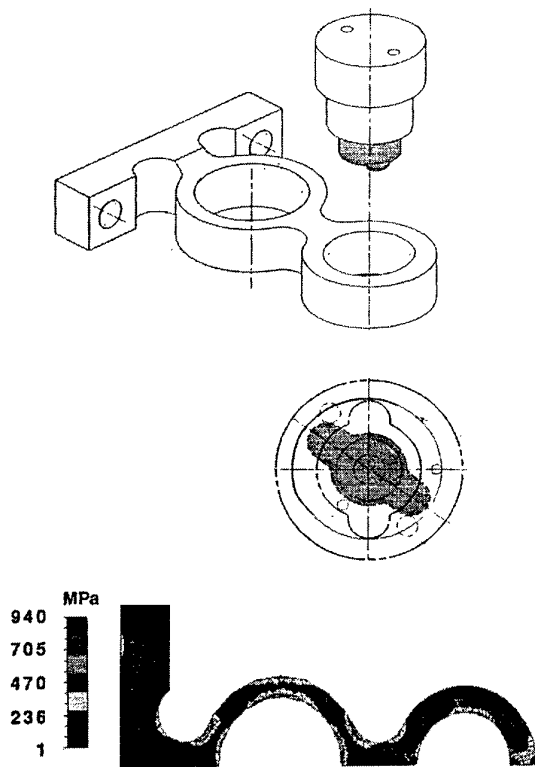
Cocking cam assembly device for the rear part of the fuselage.
